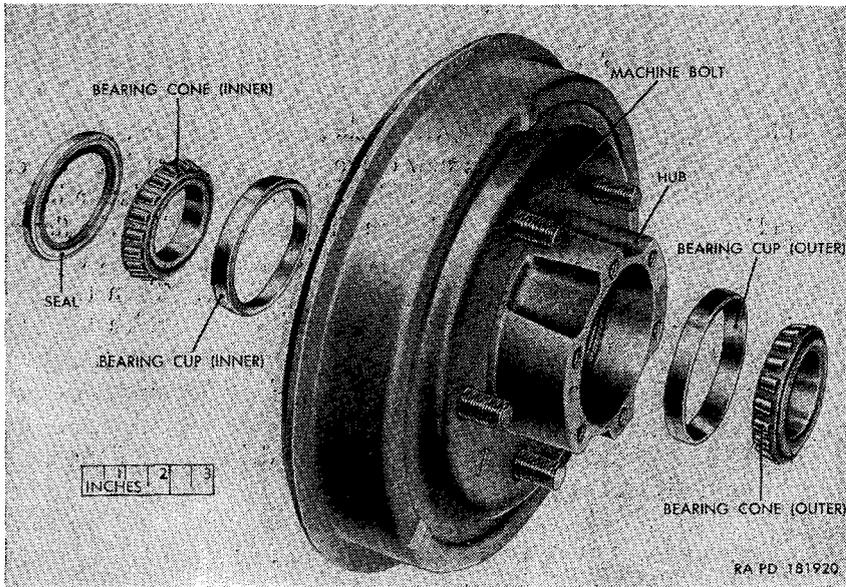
Front hub and drum, inner and outer bearing, and oil seal assemblies—exploded view.
